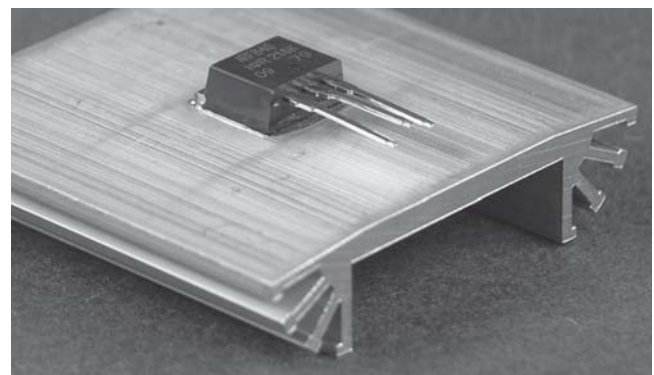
Soldered power transistor on an aluminium heat sink with a cold-sprayed copper layer
